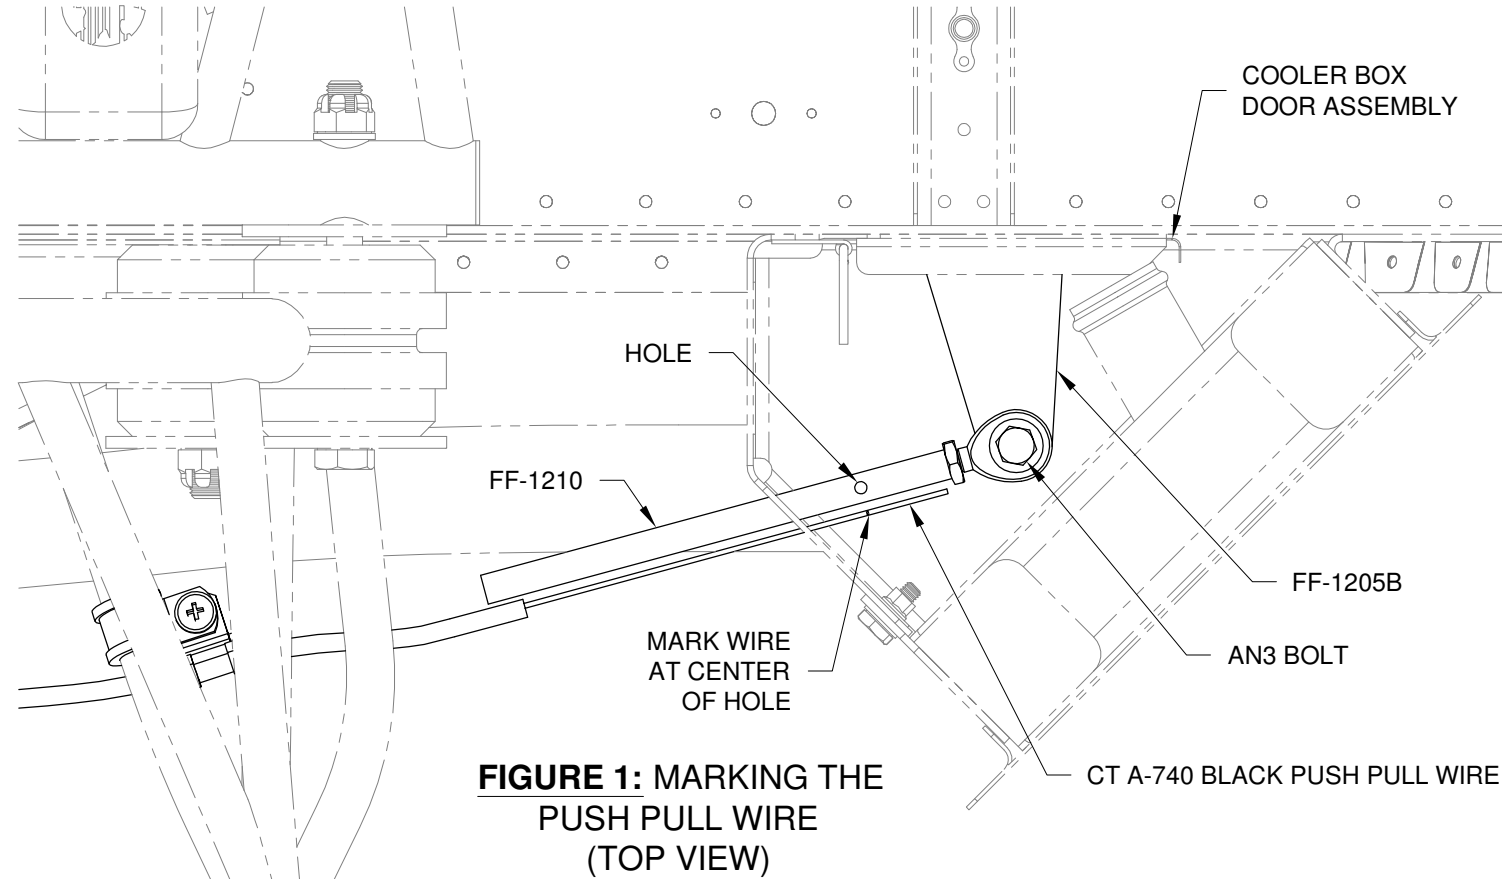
MARKING THE PUSH PULL WIRE (TOP VIEW)
